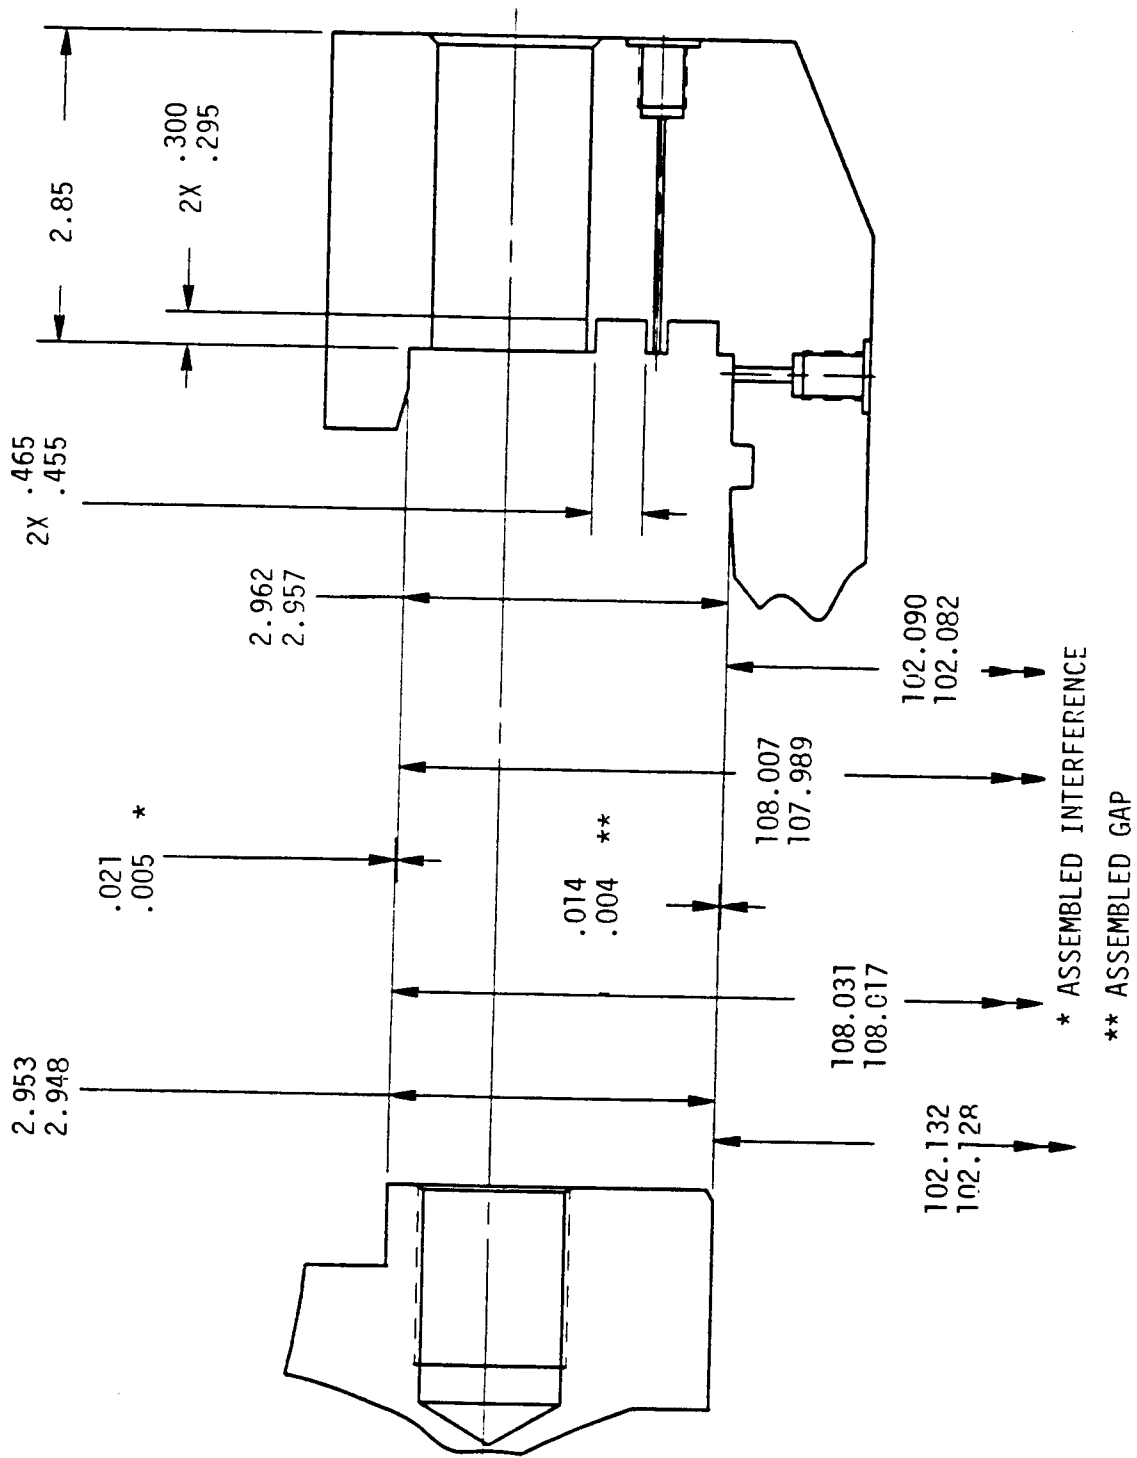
NOZZLE-TO-CASE JOINT CRITICAL DIMENSIONS.
